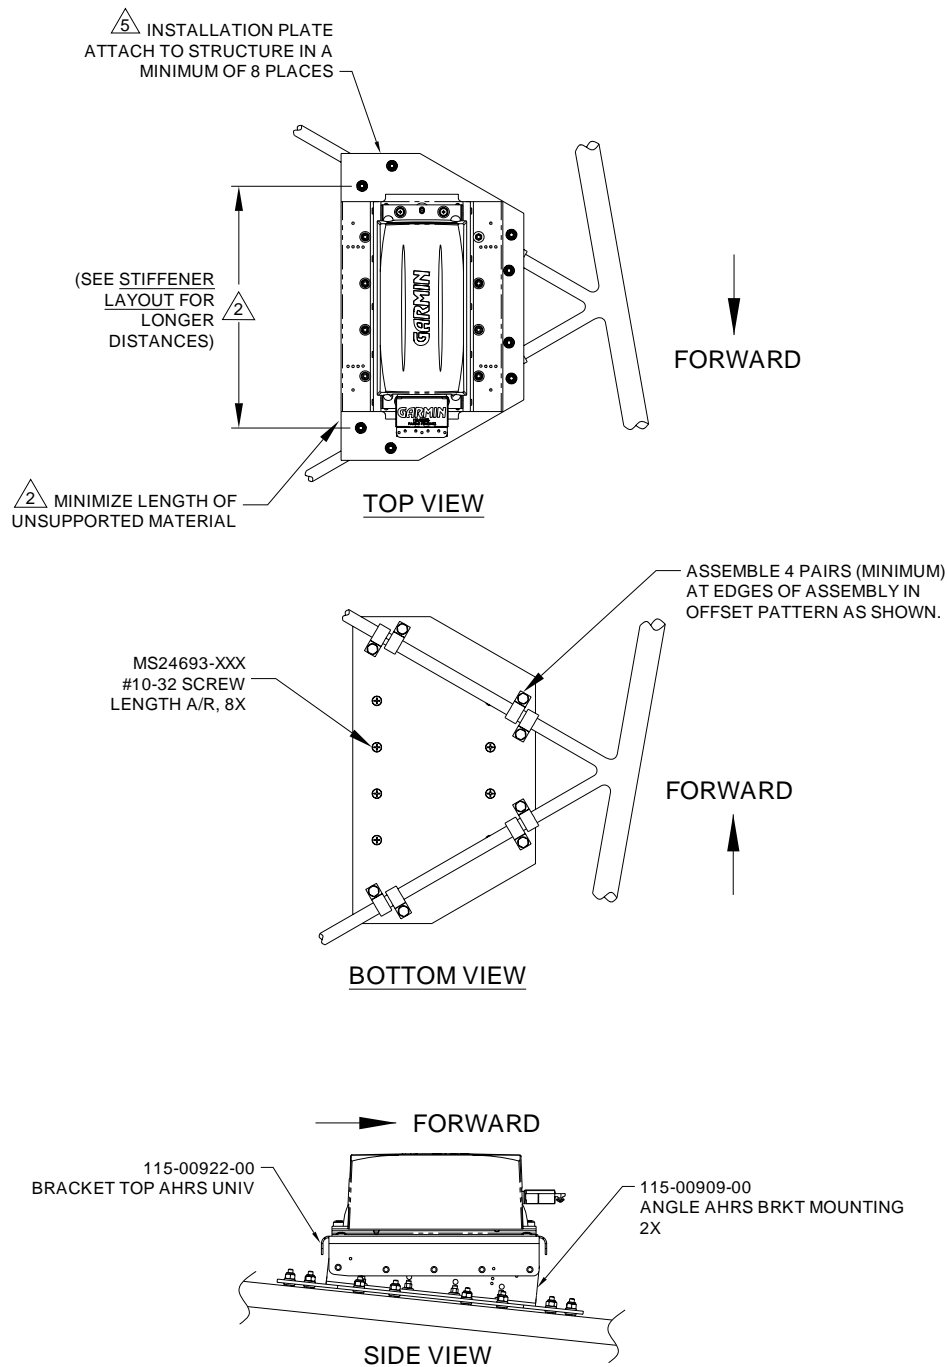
Installation of GRS 77 AHRS Universal Mount in Tube and Fabric Aircraft Using Welded Tabs
